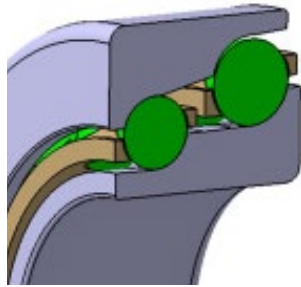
Structure example of tandem type double row angular contact ball bearing
